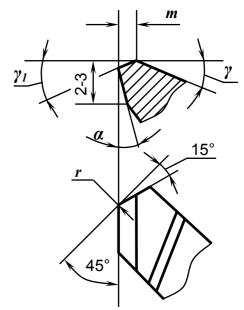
Geometric parameters of tool cutting point: α – side relief angle; γ and γ_I – rake angles; r – nose radius; m – corrective margin
